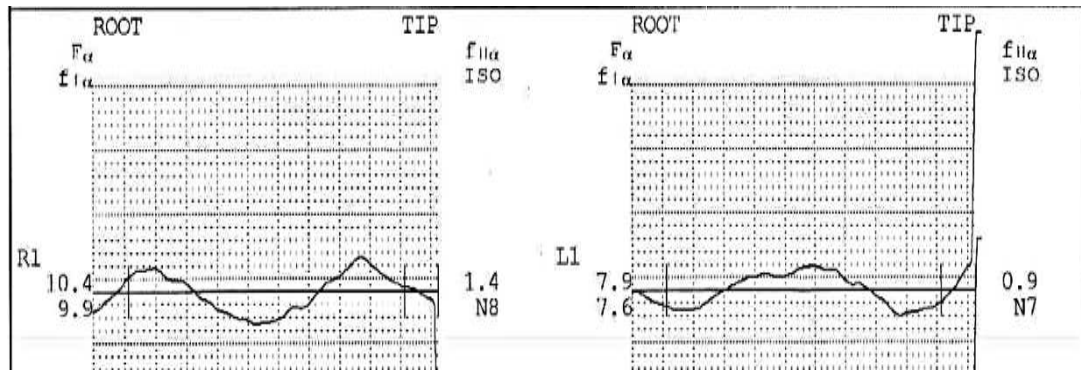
The Tooth Profile Errors of Hobbed Gear when not Adjusting
